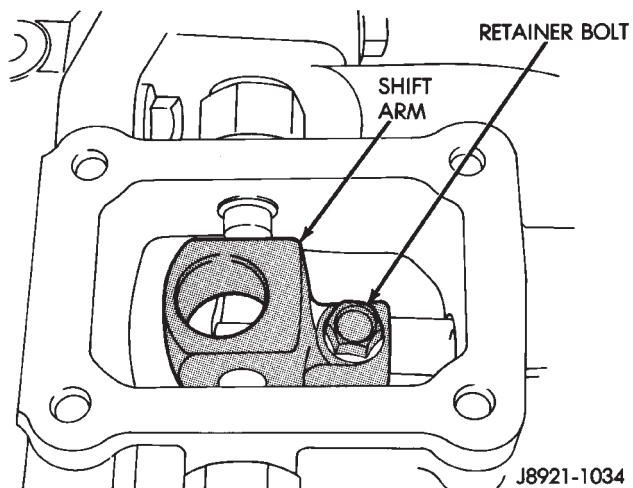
Shift Arm Retainer Bolt Removal/Installation
